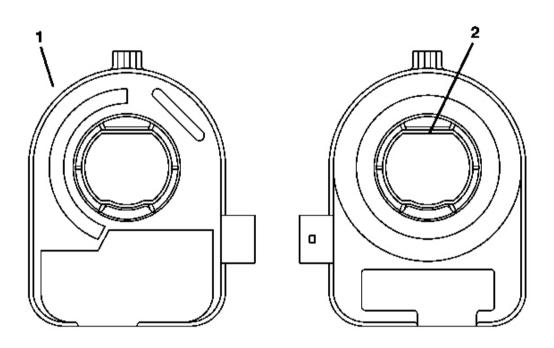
Front And Back Views Of Steering Wheel Position Sensor Courtesy of GENERAL MOTORS CORP.
